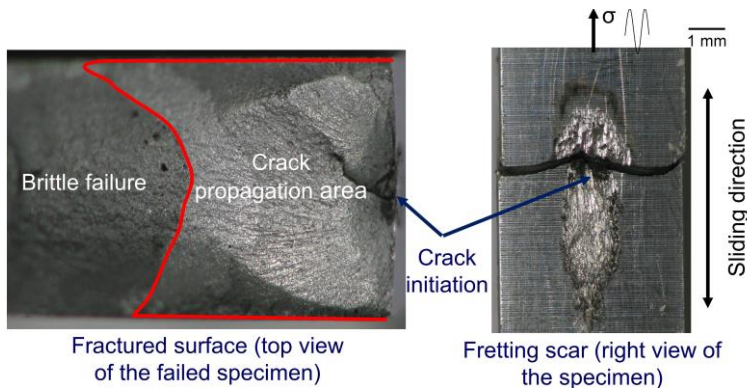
Features of failure due to fretting fatigue for a perpendicular elliptical contact
